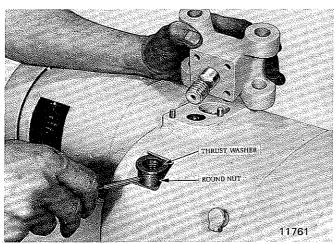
Removing Suspension Lug (1/4 Thru 1 Ton Model)
